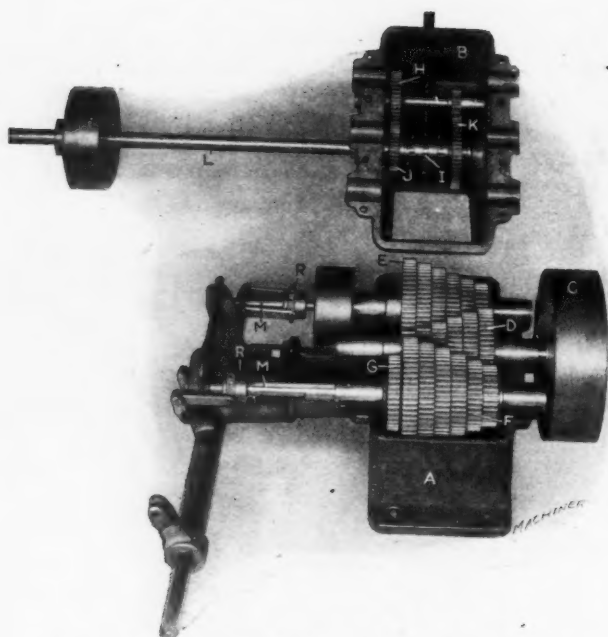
Gear-box shown in Fig. 3 opened to show Arrangement more clearly
